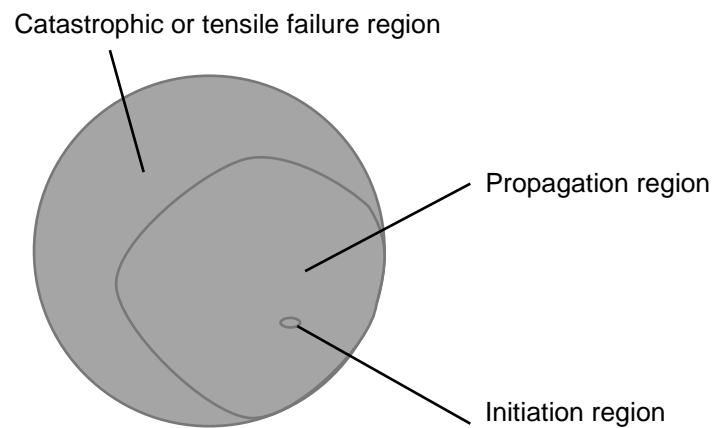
Schematic drawing of a fatigue fracture surface and the three different stages of crack formation and growth.
